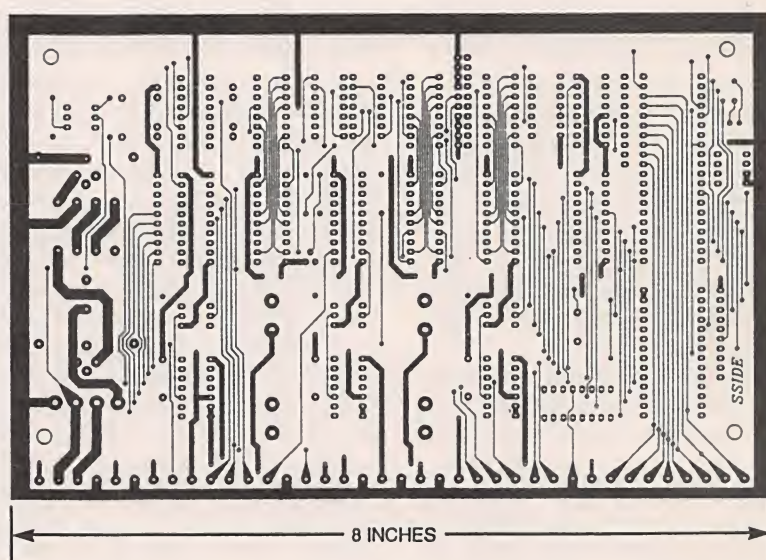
The foil pattern for the solder side of the board is shown here at half scale. Those who do not wish to make their own board, can purchase the board, a partial or complete kit, or a fully assembled and tested unit from the source given in the Parts List.
